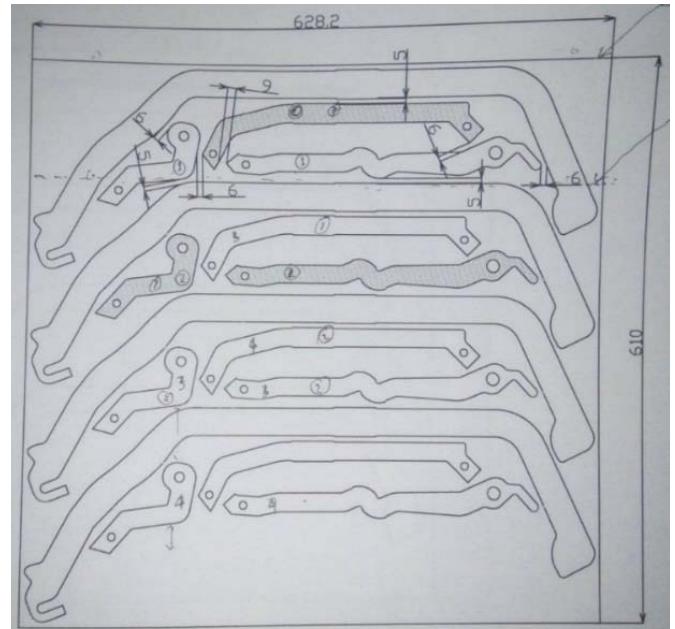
New Design Propeller Shaft Guard using Reused Scrap Material.
